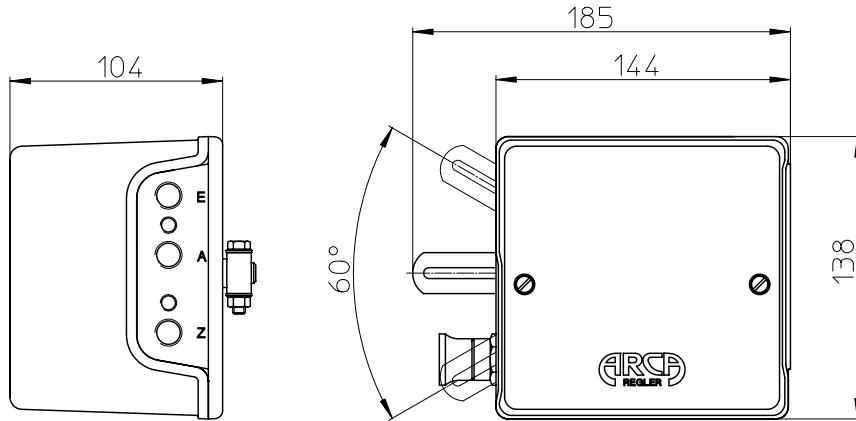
Dimensional drawing basic device type 824.P, 824.E and 824.X
